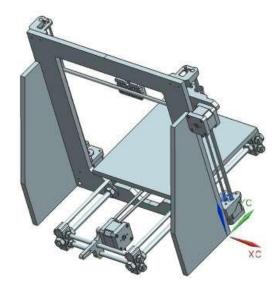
Front Isometric View in assembled state of the 3D printing Device
